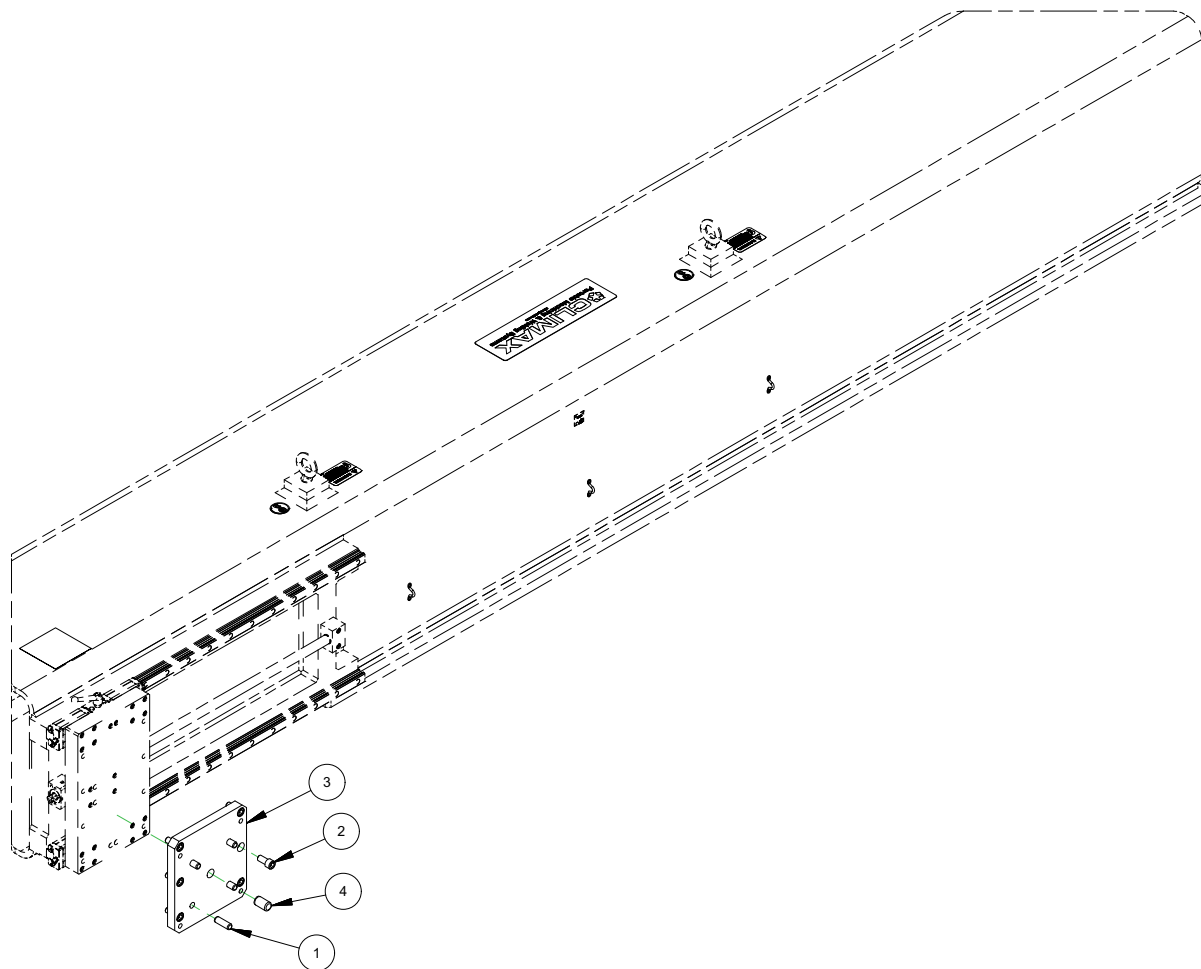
MACHINING ARM ASSEMBLY (P/N 72676)
